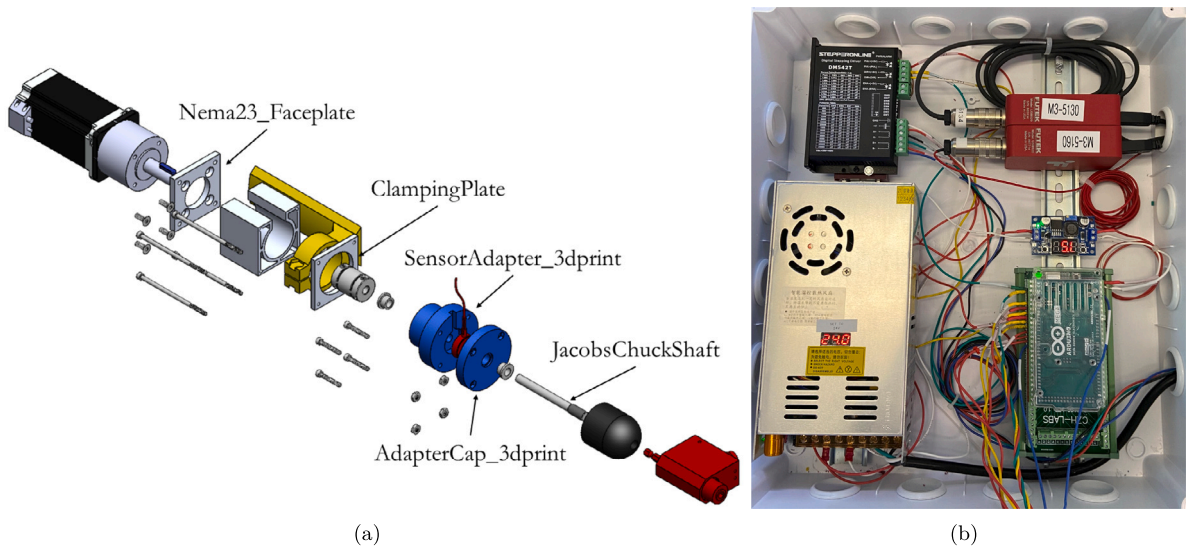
(a) an isometric view of the assembled build components (b) and the electronics cabinet layout for DIN rail mounts.
